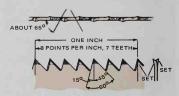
Crosscut saw teeth. (Stanley Tools)
